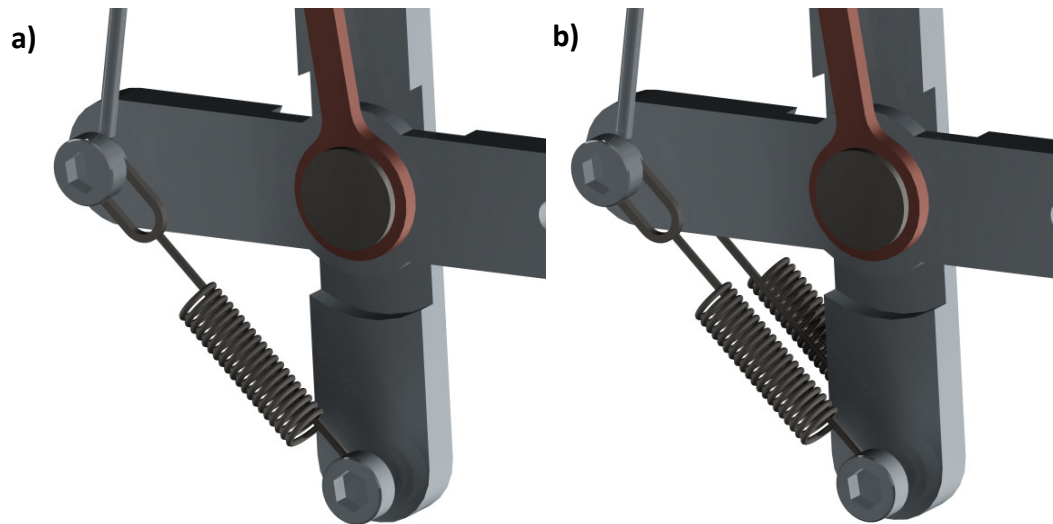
a) Single gravity compensation spring design and b) double spring design.
